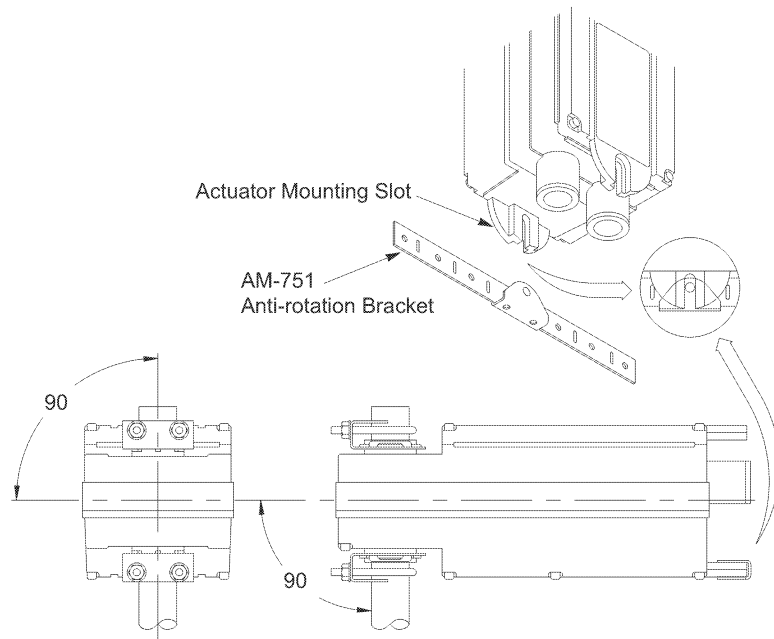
Mounting Anti-rotation Bracket to Actuator.
